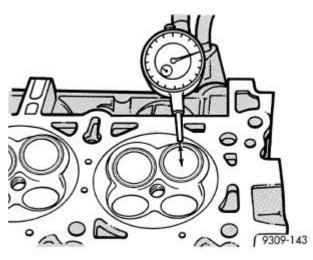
Measuring Valve Guide Wear Courtesy of CHRYSLER LLC
